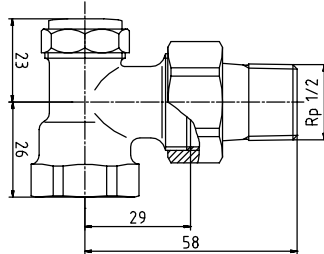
Angle with 1/2" internal to 1/2" external thread
